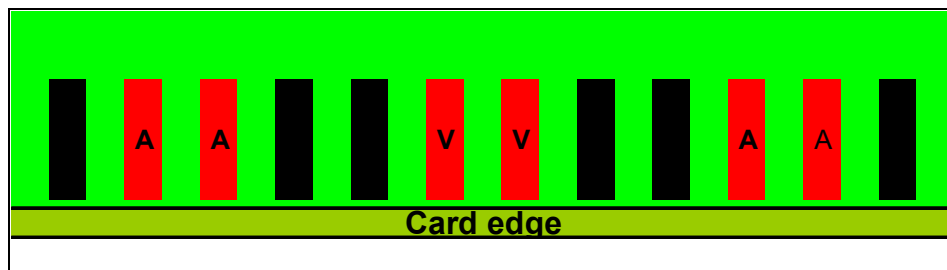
PCIe Series edge card connector pad pattern; V = Victim, A = Aggressor
